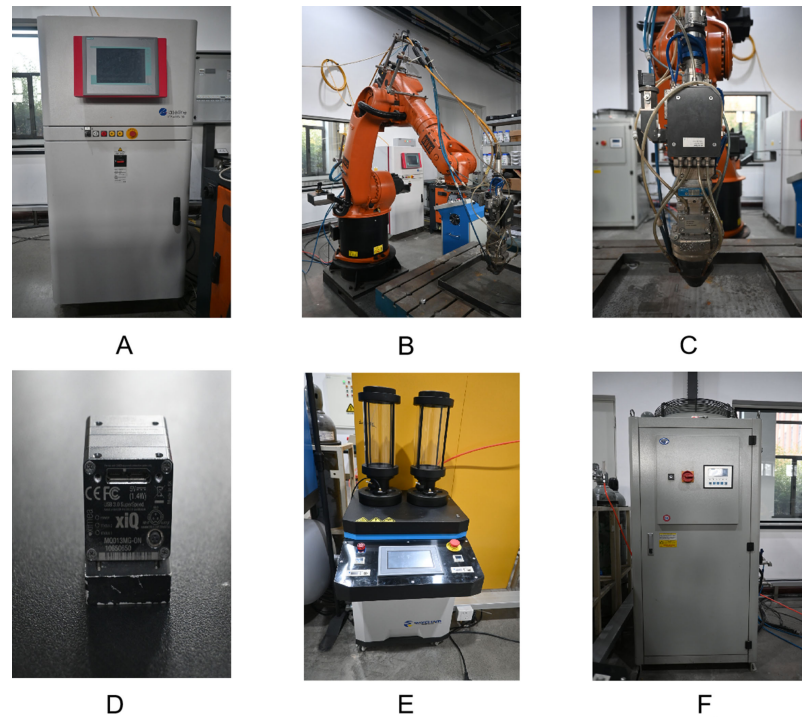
Diagram of experimental laser additive remanufacturing equipment. (A) Semiconductor laser; (B) six-axis robot; (C) coaxial laser head; (D) CMOS camera; (E) carrier gas powder feeder; (F) laser water cooler.
